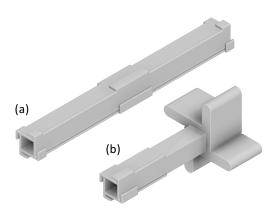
Representative pinwheel types. (a) Central pinwheel - Three tabs per side hold the optical separator in place. (b) End pinwheel - spacer arms separate the PMT housing bodies and support the pinwheel string.
